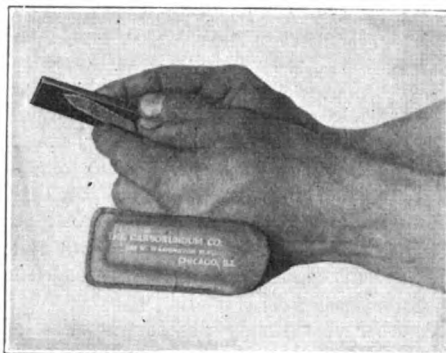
Stoning Up a Tool Used for Cutting Threads.
